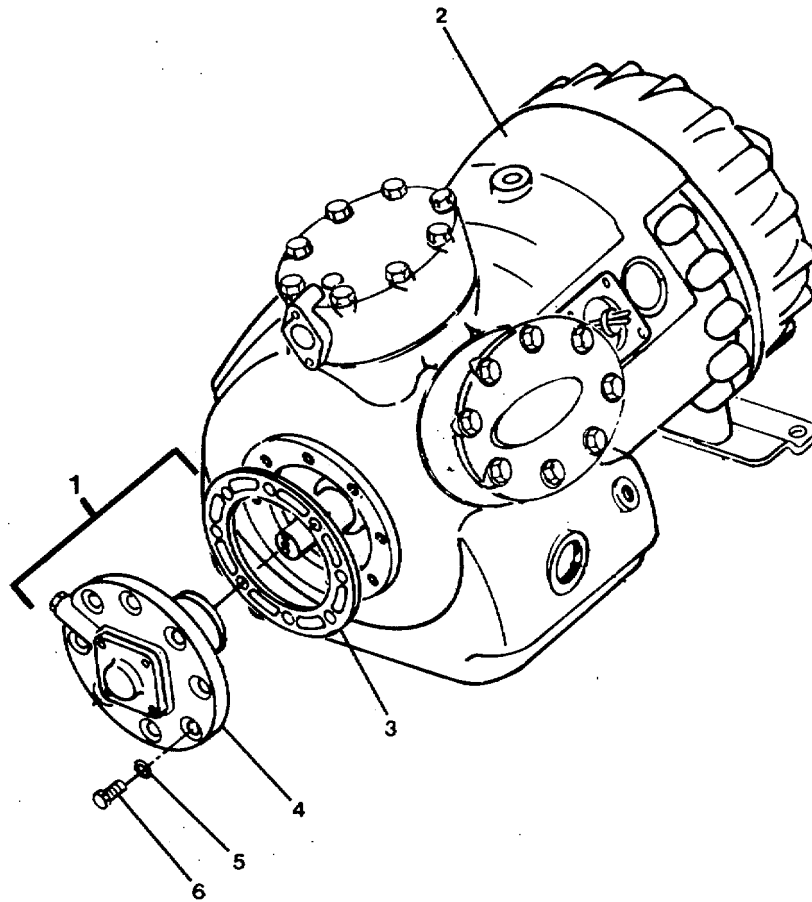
Replacing Pump and Bearing Assembly.
